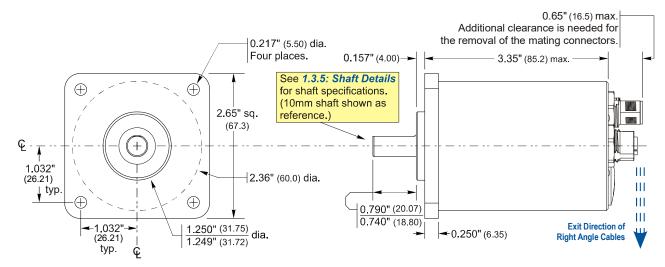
Flange Mount, Side Connector Outline Drawing
